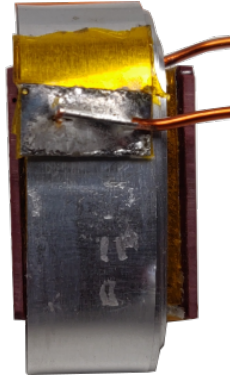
Soldered copper wire (0.9 mm diameter) to nickel plated aluminum foil with lead-free solder paste (Sn96.5/Ag3.5)
